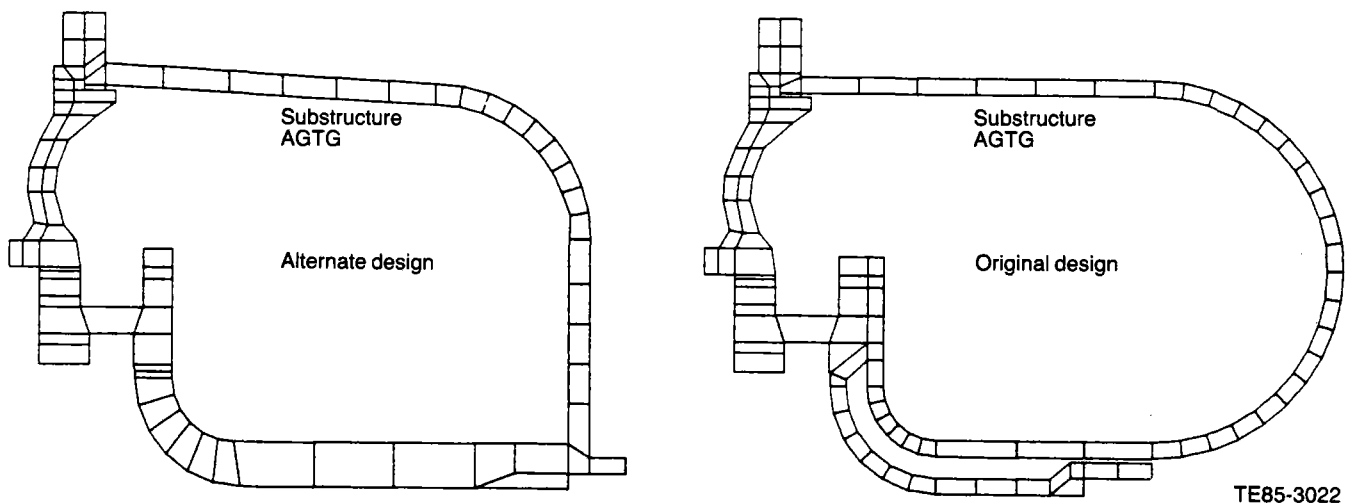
Scroll assembly 2-D finite element models for CBO alpha-SiC.
